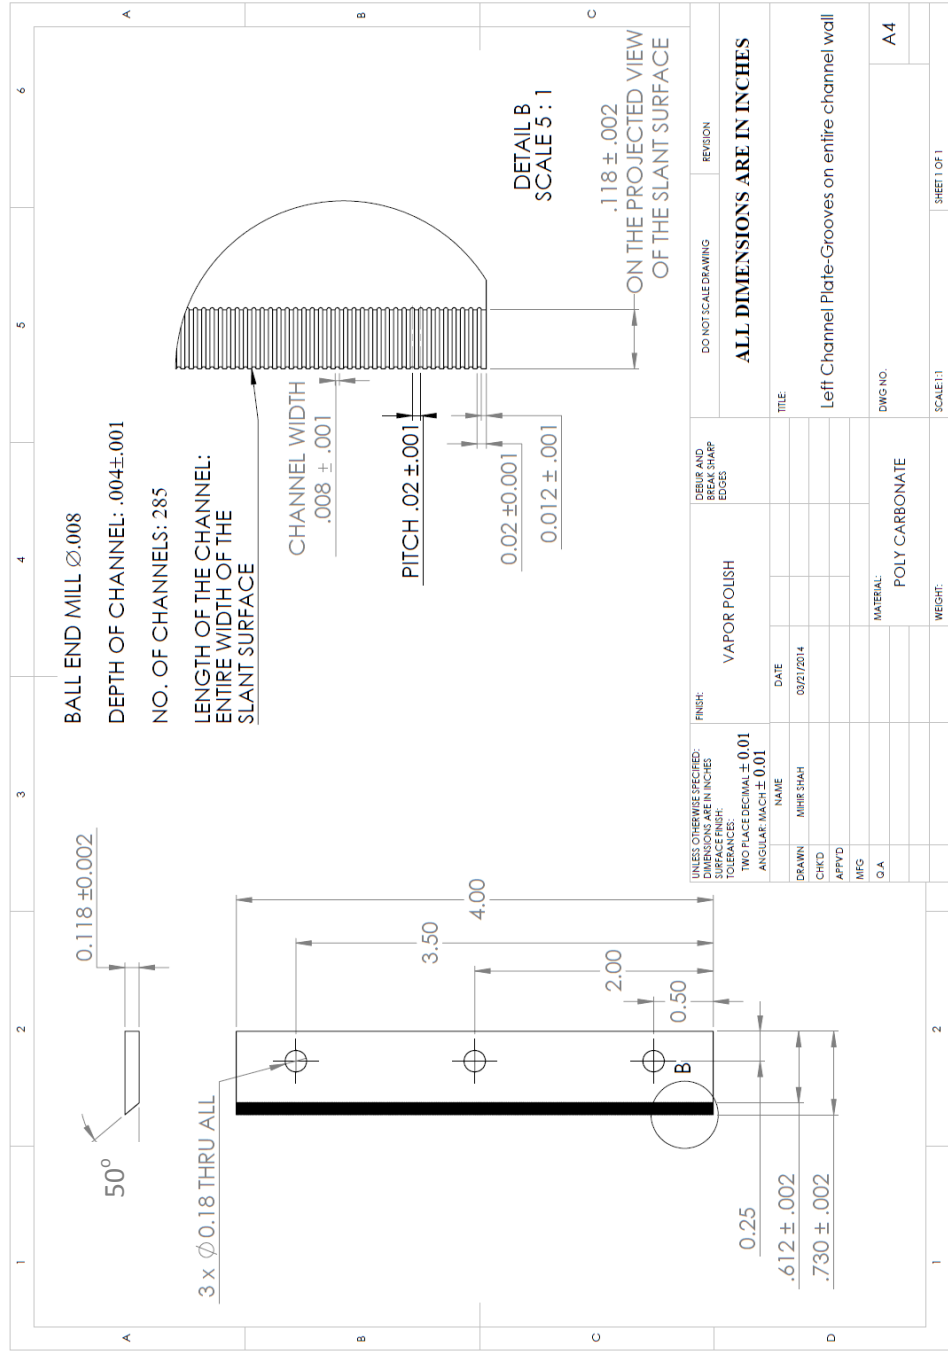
Left Channel Plate- Engineering Drawing-Grooved C1.2
